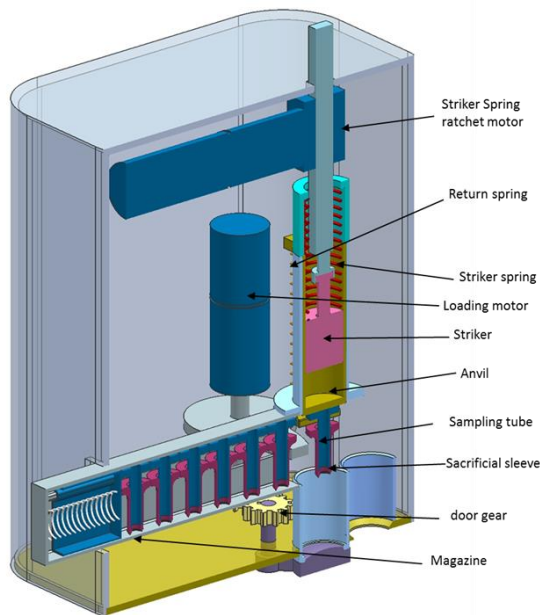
Drive tube sample collection and transfer system main components integrated into a housing
